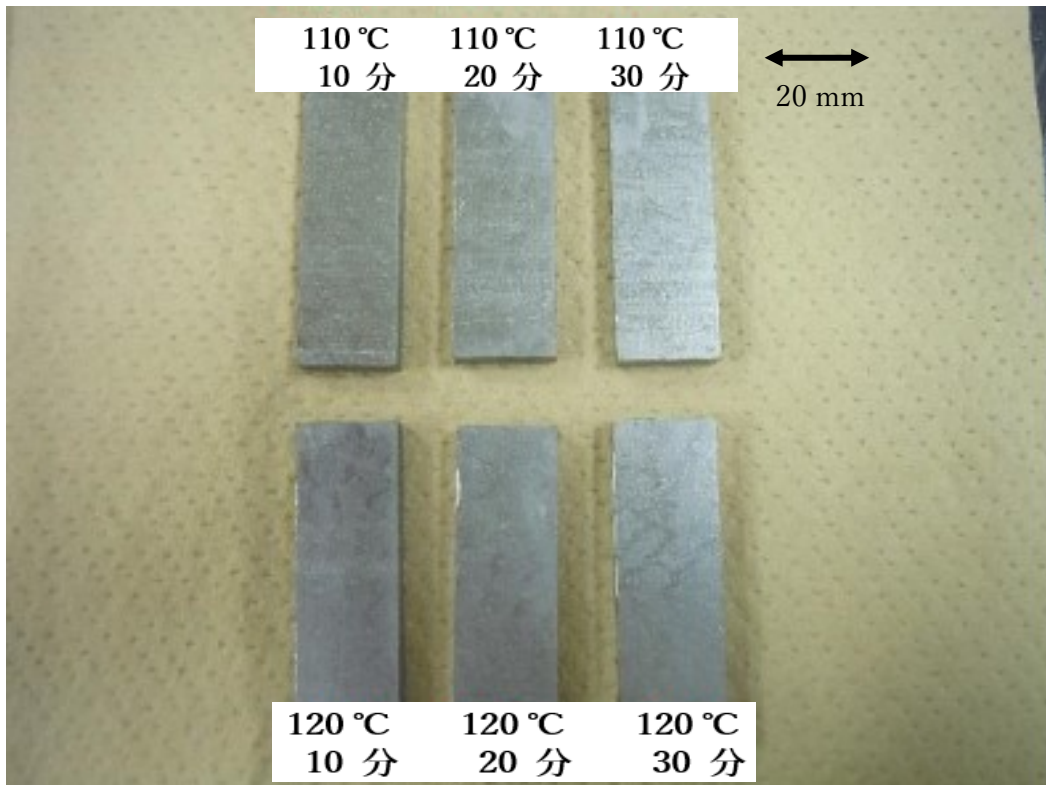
Appearance EL-Nickel plating processing on PEEK resin.
